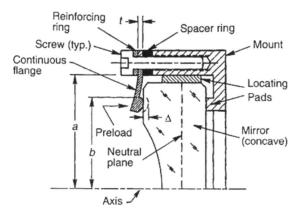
Schematic configuration of a circular flange type retainer axially constraining a concave mirror in a mount.
